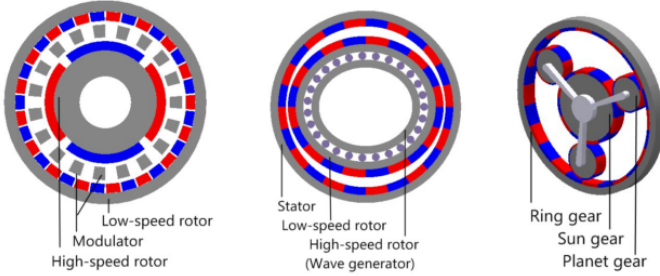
Concentric, harmonic and magnetic planetary gears. [5]
